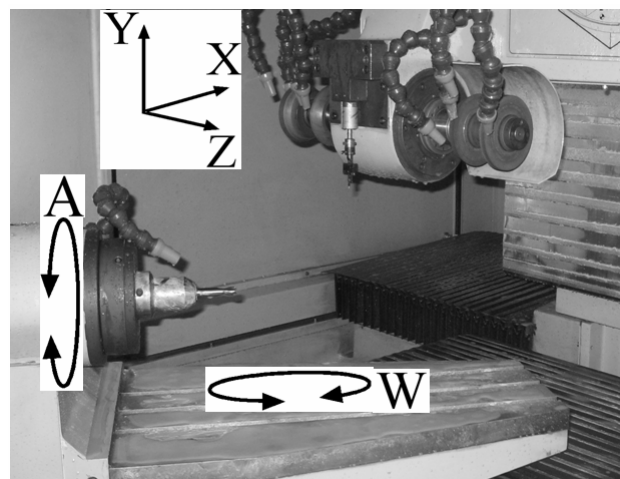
The 5-axis CNC grinding machine for manufacturing of ball-end mills.
